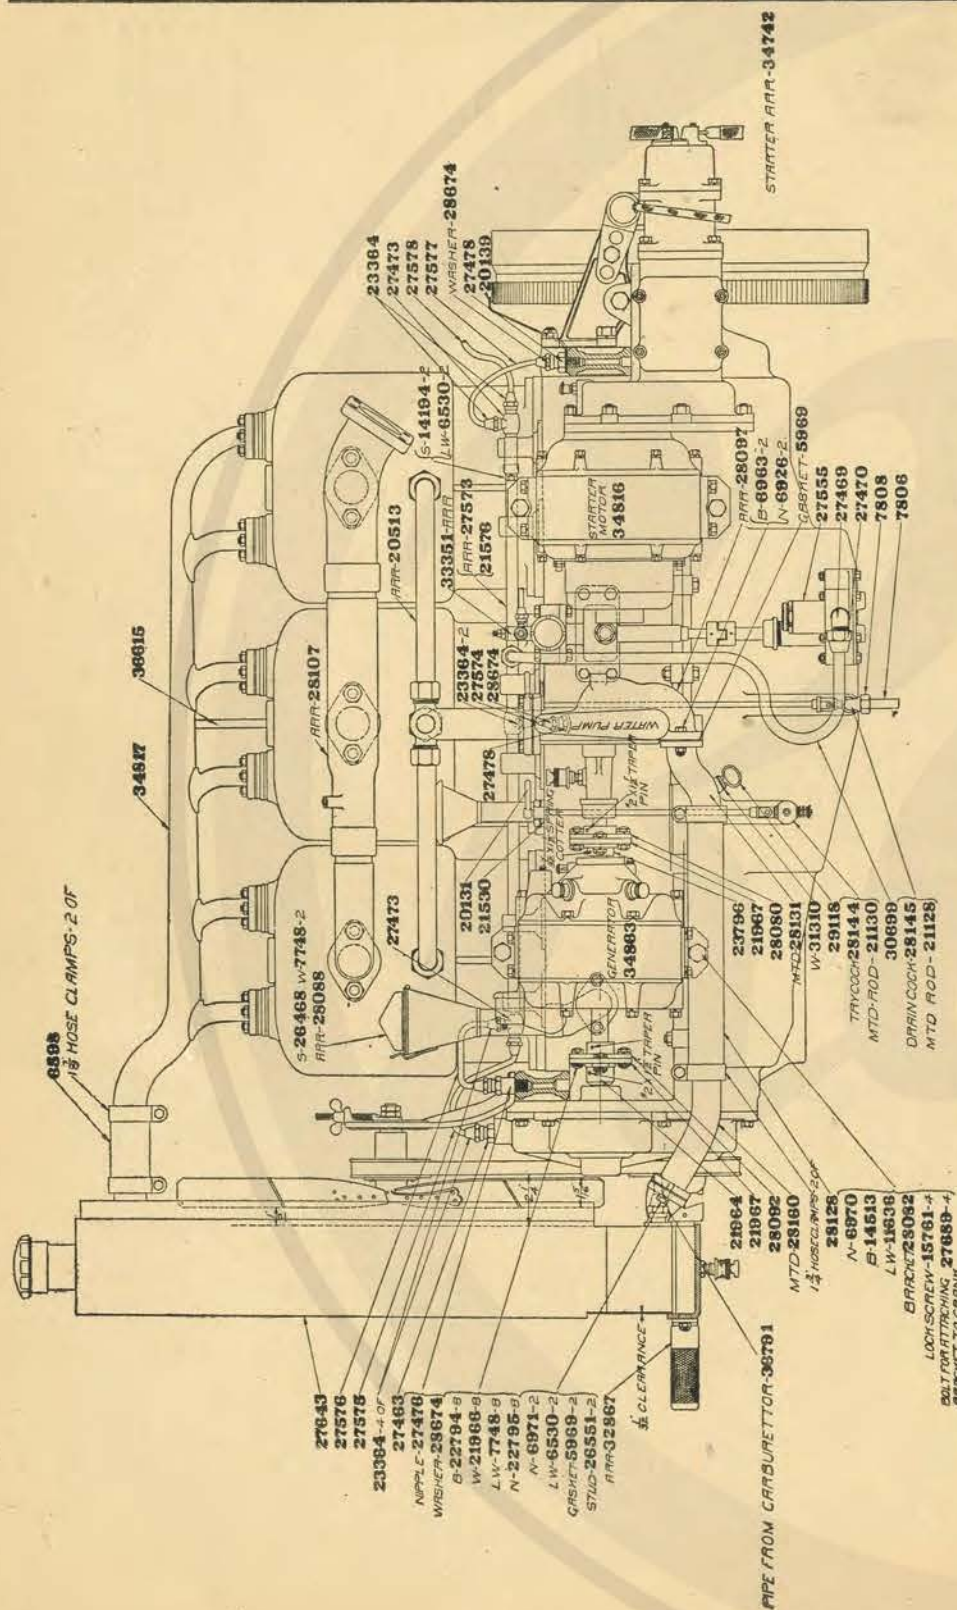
Left-hand side view of Engine, showing location of Lighting Generator and Electric Starting Motor.
